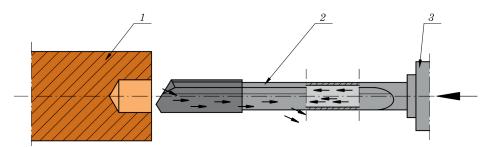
Guiding a barrel drill through a pilot hole: 1 - workpiece, 2 - drill, 3 - tool holder
